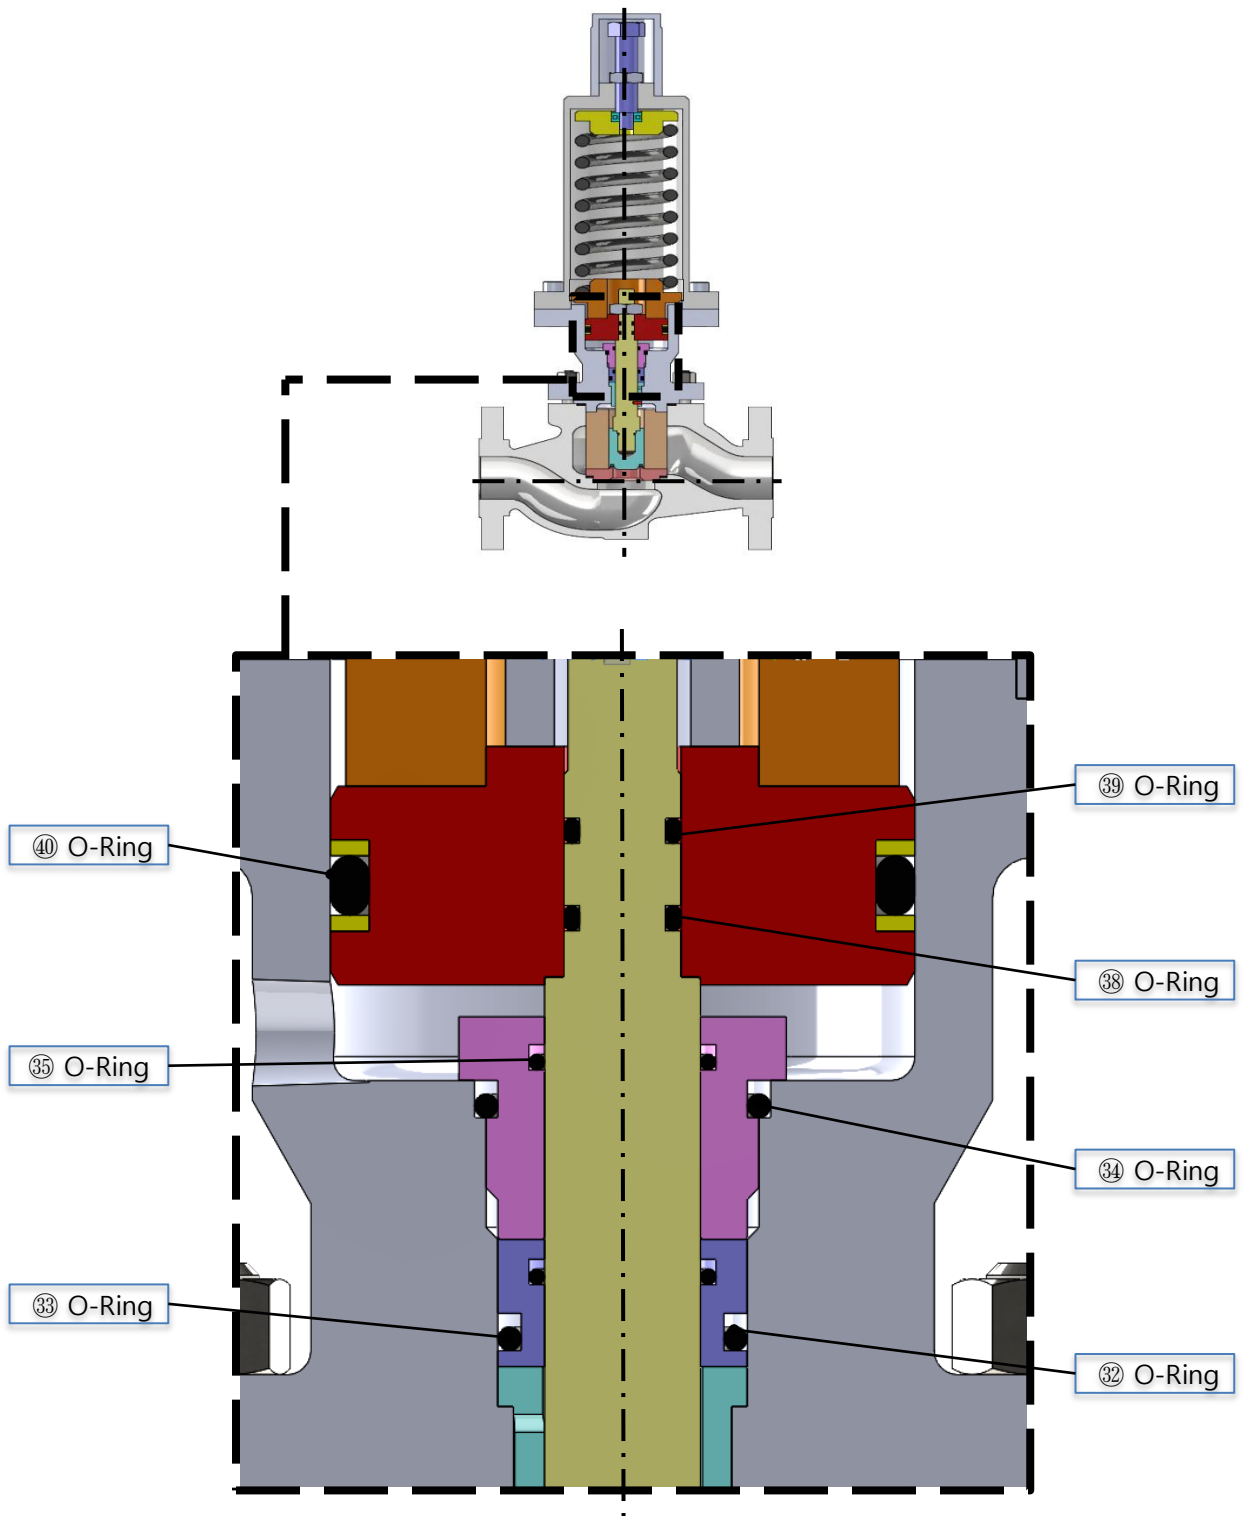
Assembly Sectional Drawing (liquid Type)
